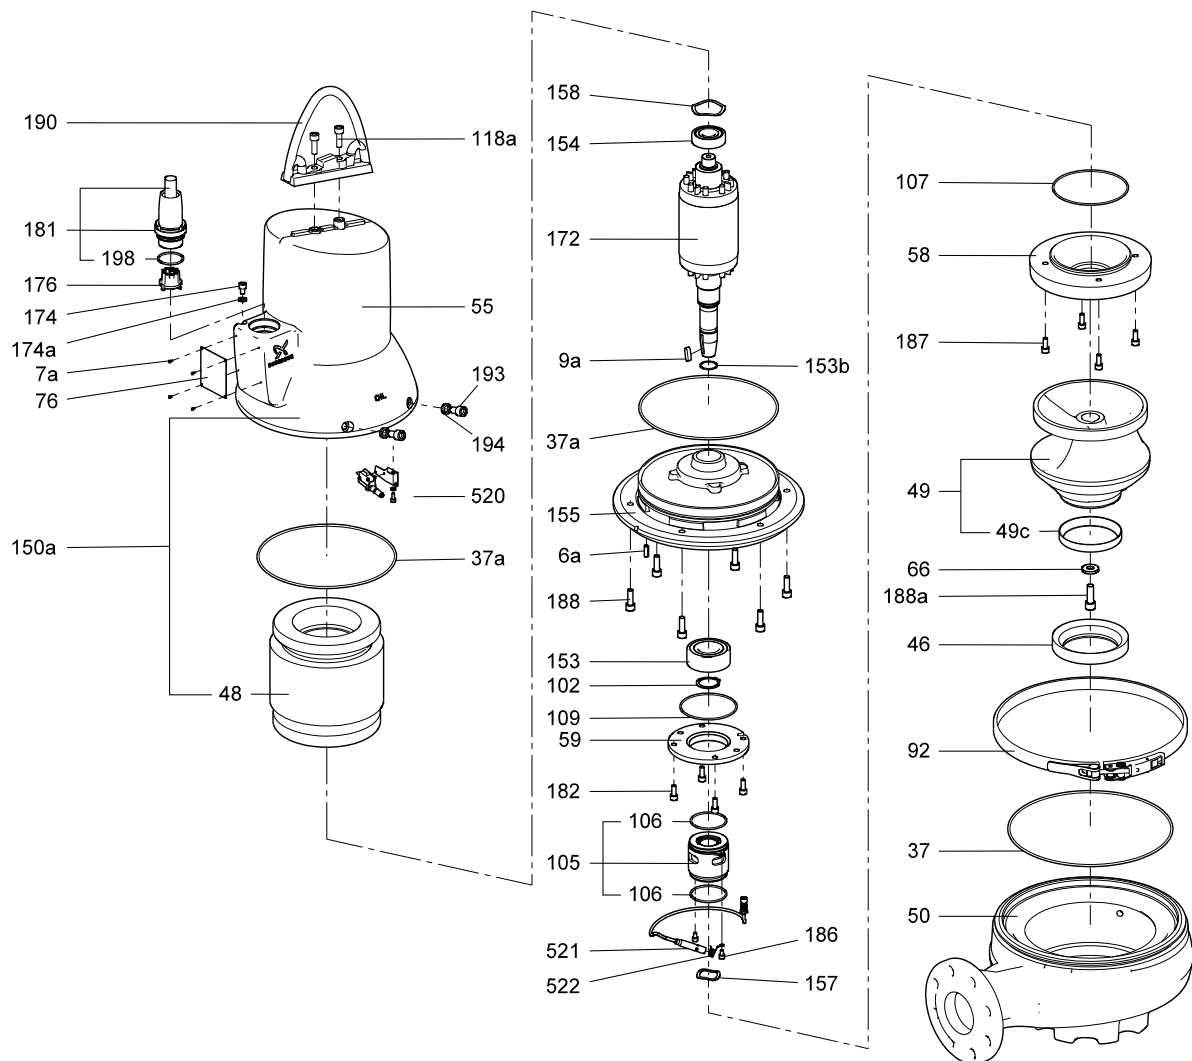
Exploded view, SL1.50.65.22/30/40, SL1.50.80.xx, SL1.80.80.xx, SL1.80.100.xx, SL1.100.100.xx with sensor
